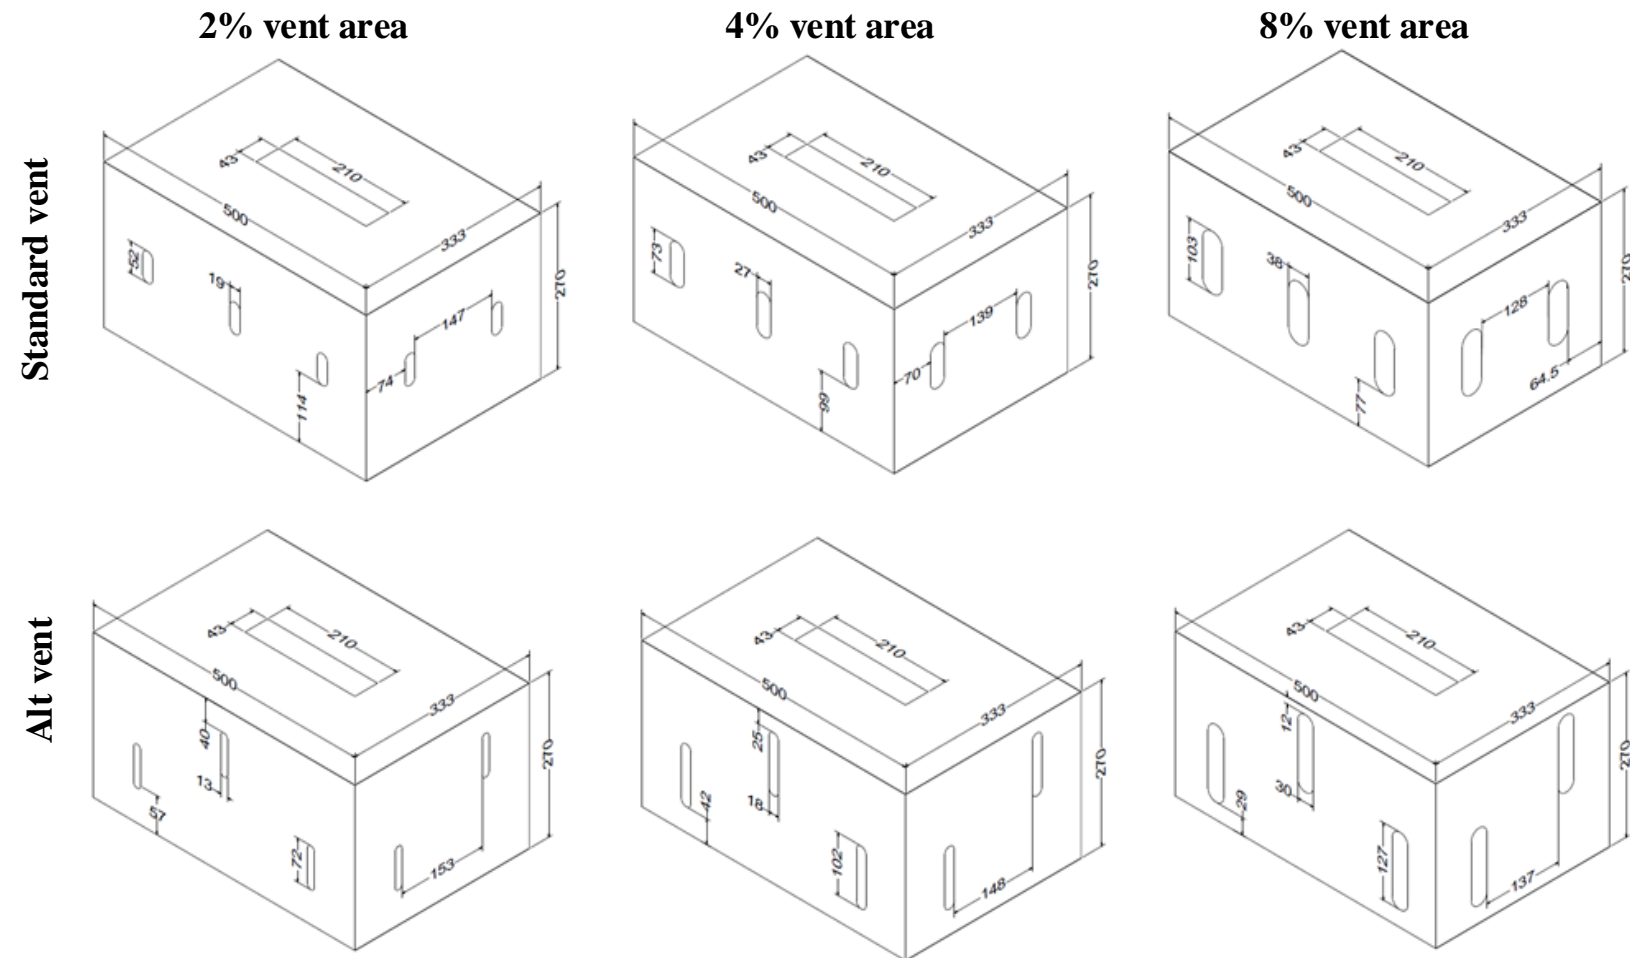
Geometry and dimension (in mm) of the corrugated paperboard packages.
